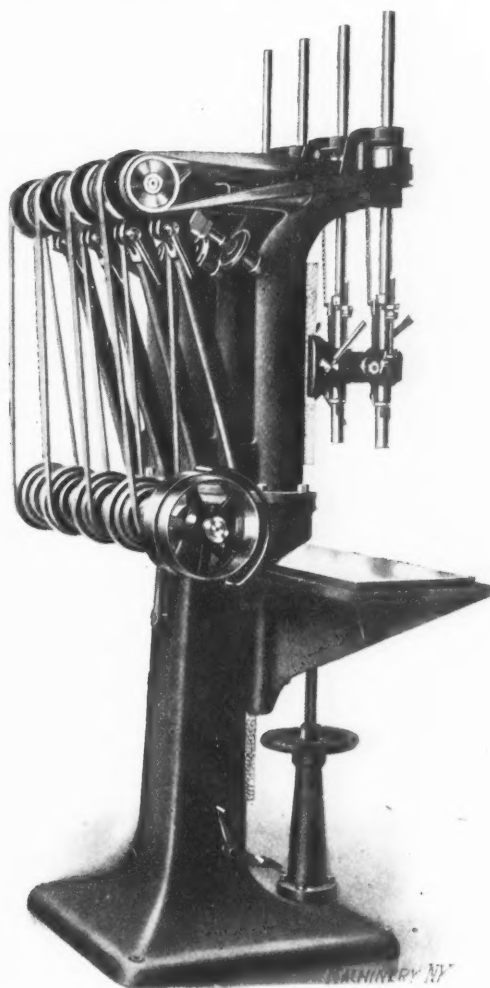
Rear View of Leland Sensitive Drill, showing Driving Arrangement
